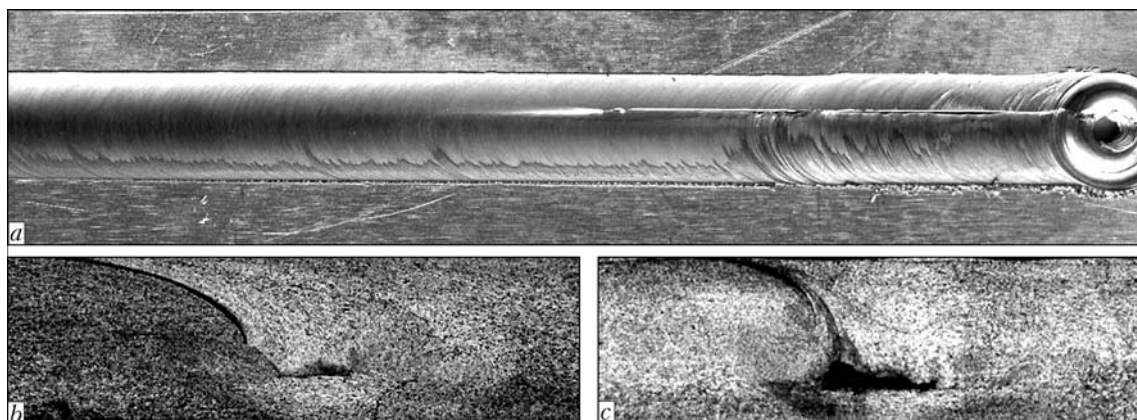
Appearance of the face of a weld (*a* – $\times 1.4$) produced by FSW at assembly of the butt with a variable gap (0.2–1.2 mm) between the edges, and transverse macrosections of welded joints of AMg2 alloy 2 mm thick at the gap of 0.3 (*b*) and 0.5 (*c*) mm
